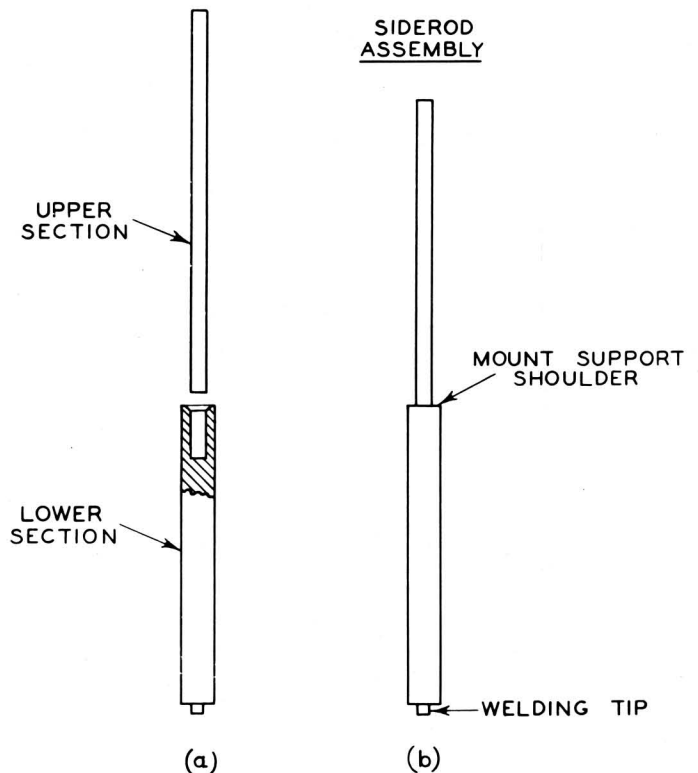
Siderod assembly showing upper and lower sections and welding tip.
